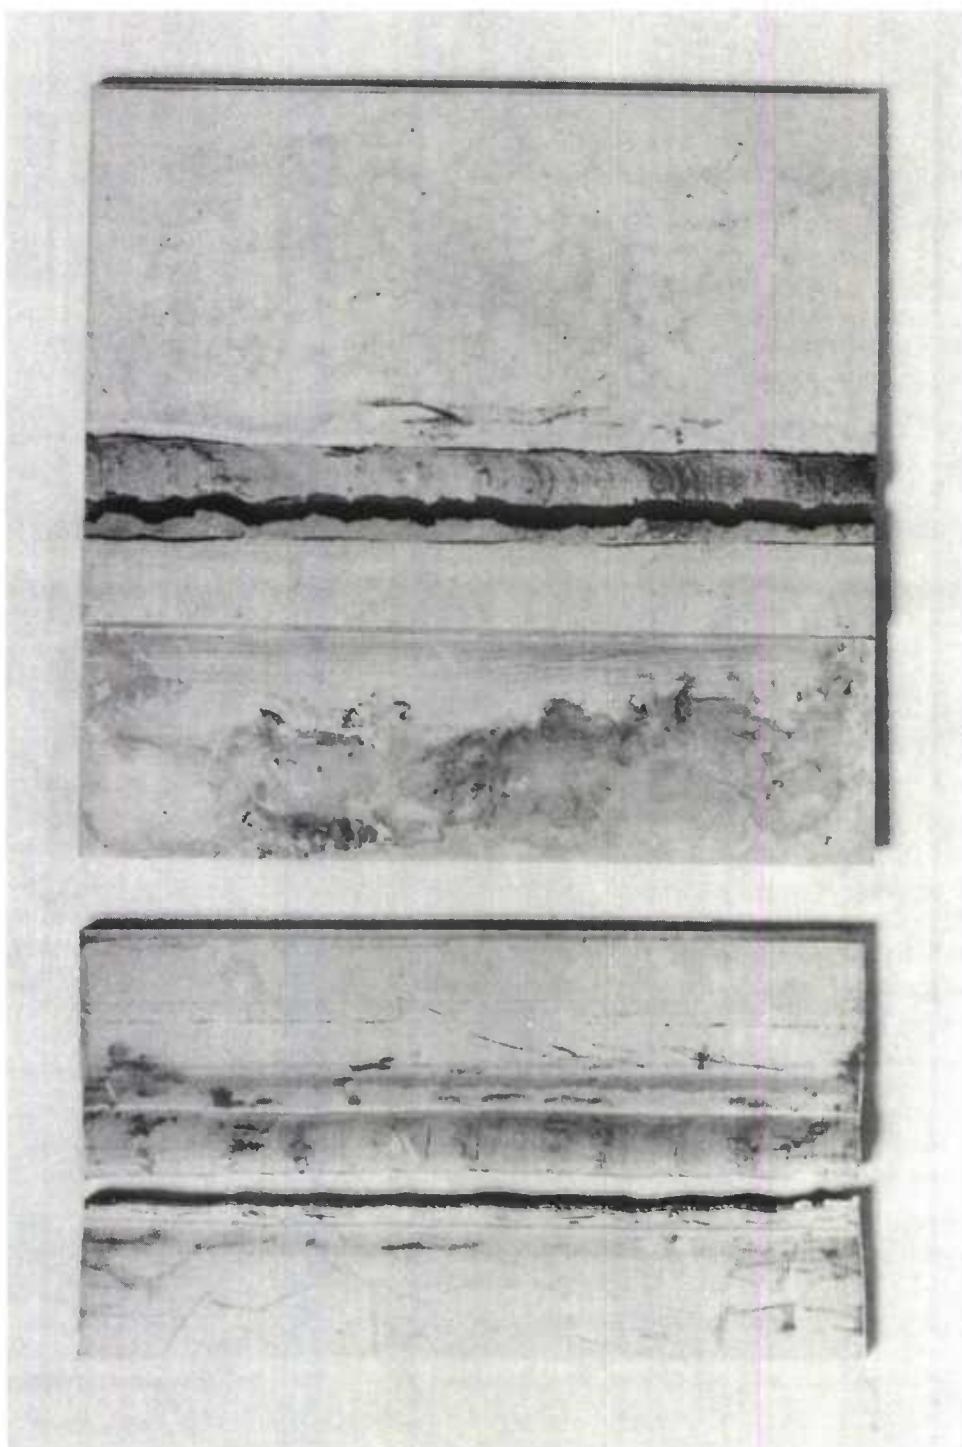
Fractured Fatigue Specimens - 5456-H343 Aluminum Alloy (-320° F)
